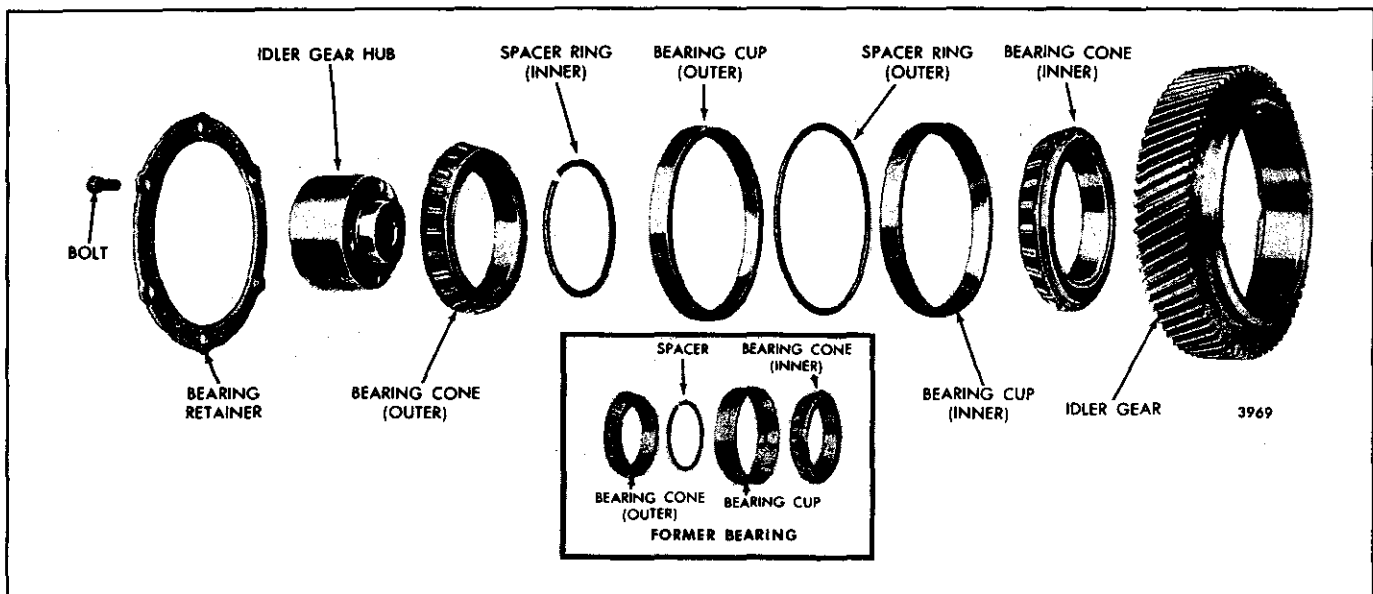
Idler Gear Details and Relative Location of Parts (Current Bearing)
